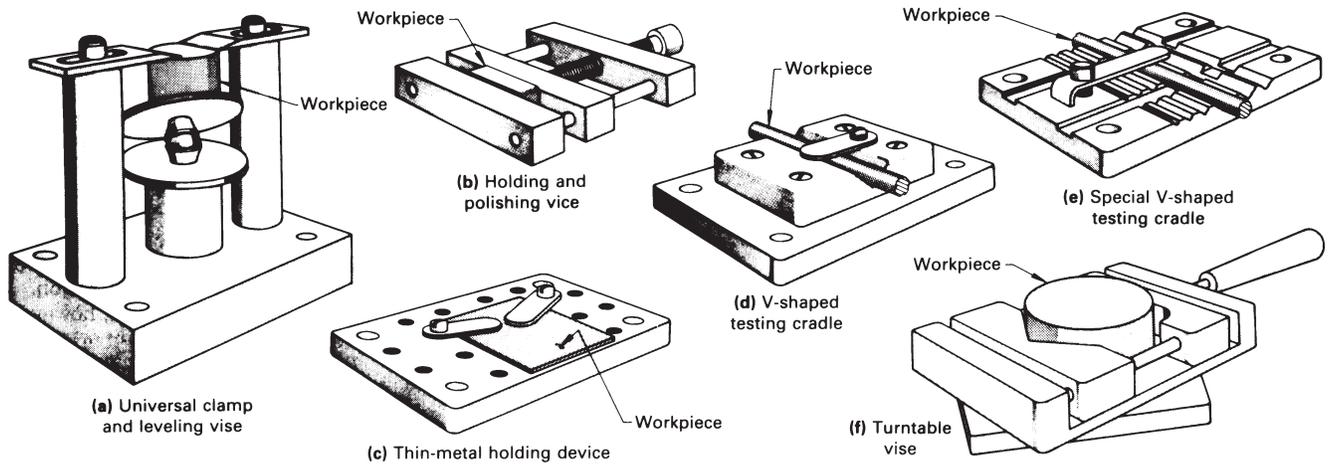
Examples of fixtures for holding test pieces for microindentation hardness testing
